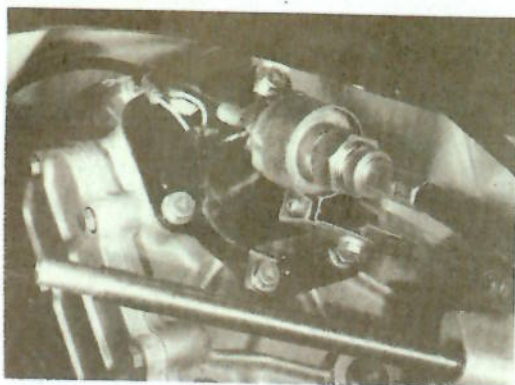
POSITION OF SPEED DETECTOR BRACKET ON SPLINE SHAFT CAP.
